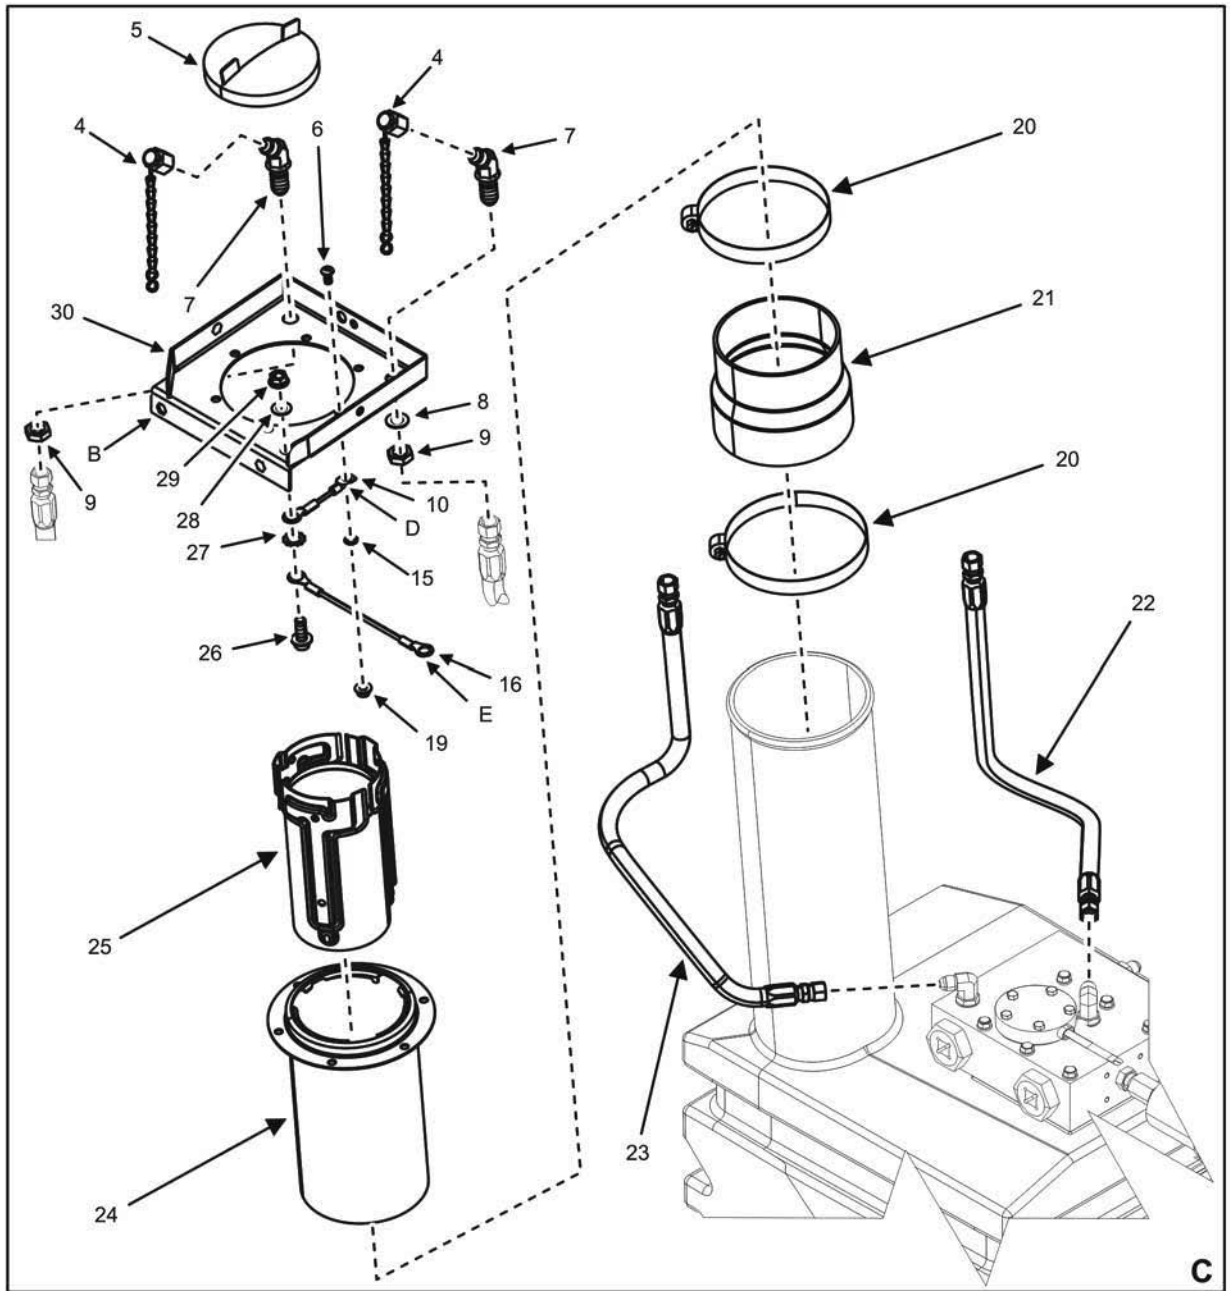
Fuel System Assembly (Sheet 3 of 6).
